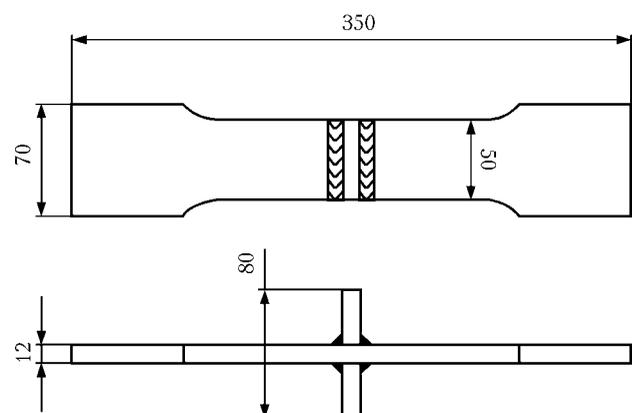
Schematic of a sample of 09G2S steel welded joint
